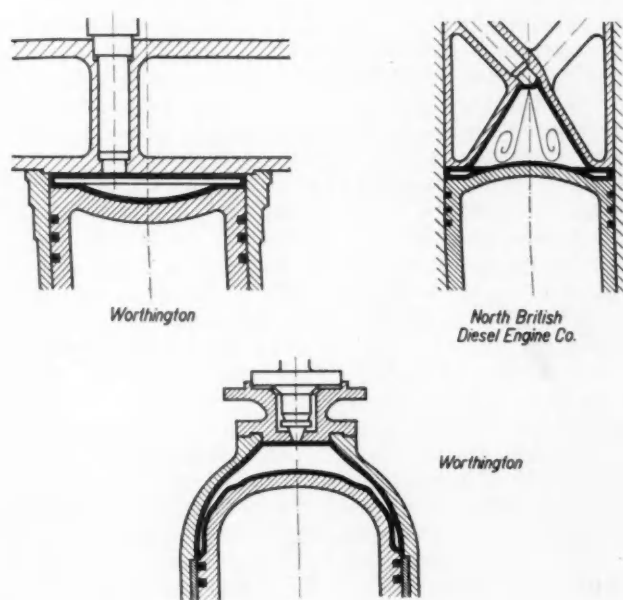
COMBUSTION-CHAMBERS OF AIR-INJECTION ENGINES
